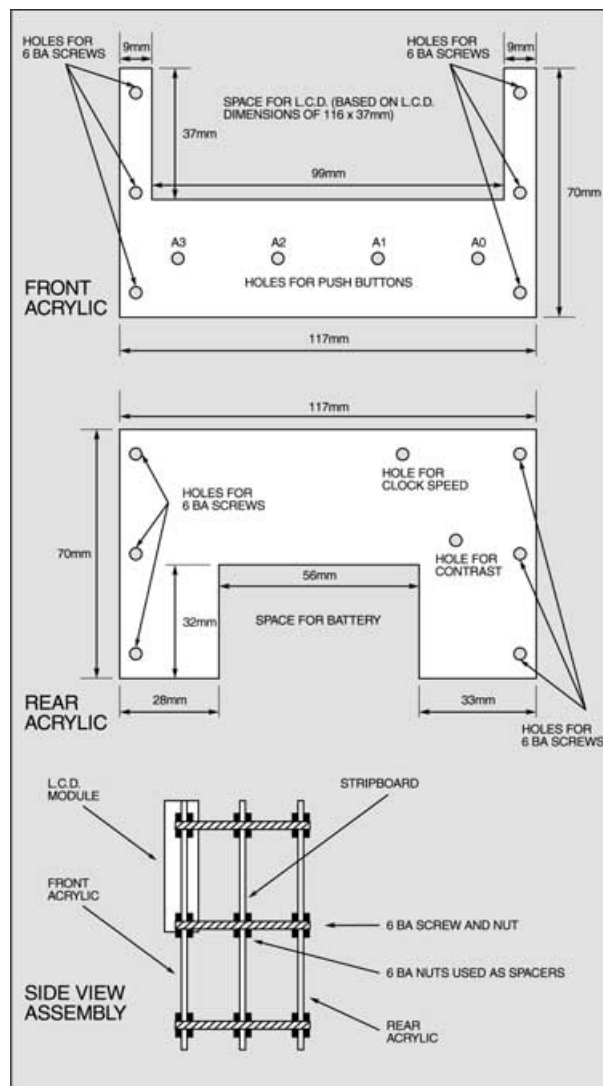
Construction details of the perspex plates and how they "sandwich" the Mini-Enigma stripboard.
